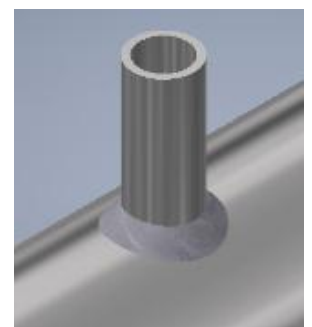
Stick through with standard “J” bevel weld joint
